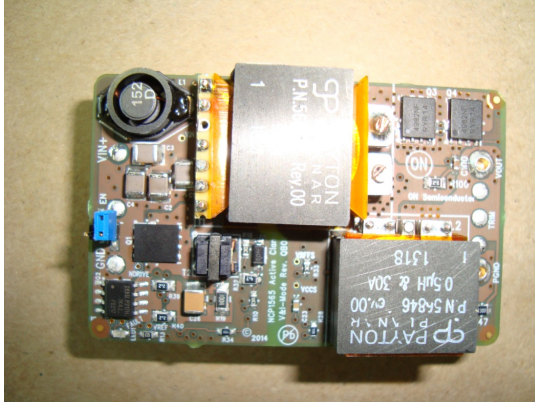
The 100-W Converter Fits in a Compact 6-layer Quarter Brick PCB Size
